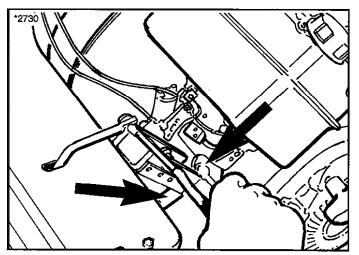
Disassemble Variable Suction Adjustment Control Bracket From Engine
